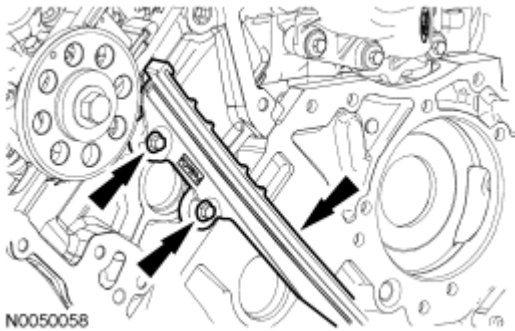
Locating RH Primary Timing Chain Guide Bolts
